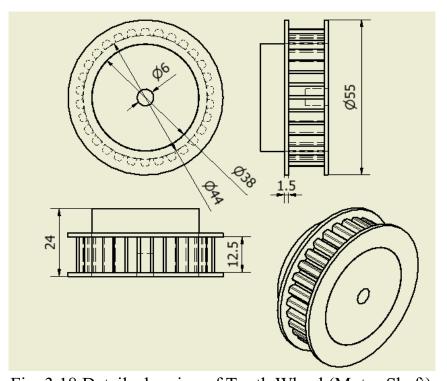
Details drawing of Tooth Wheel (Motor Shaft)
